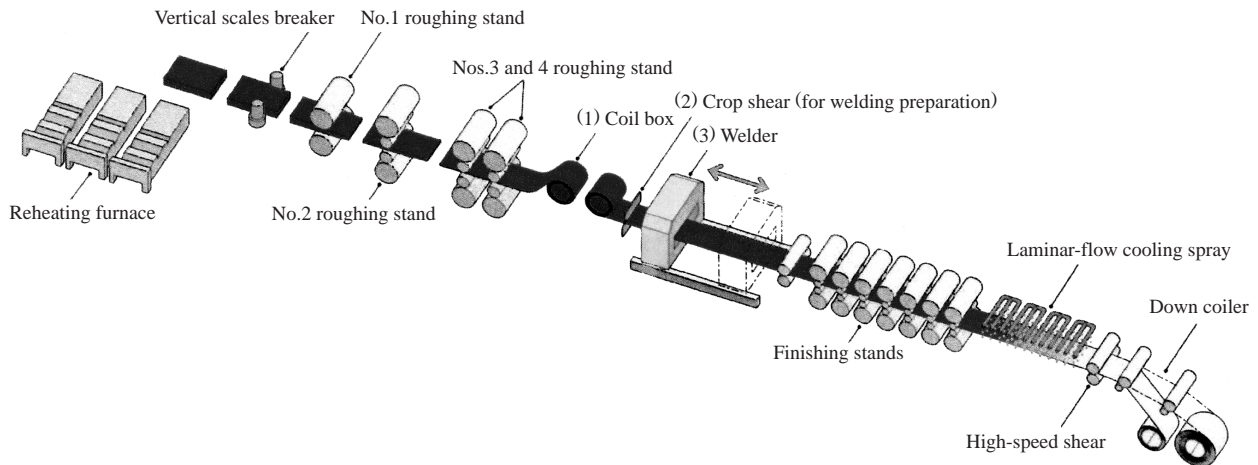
Outline of 45 kW CO₂ laser welding system for full-continuous rolling of hot strip mill
